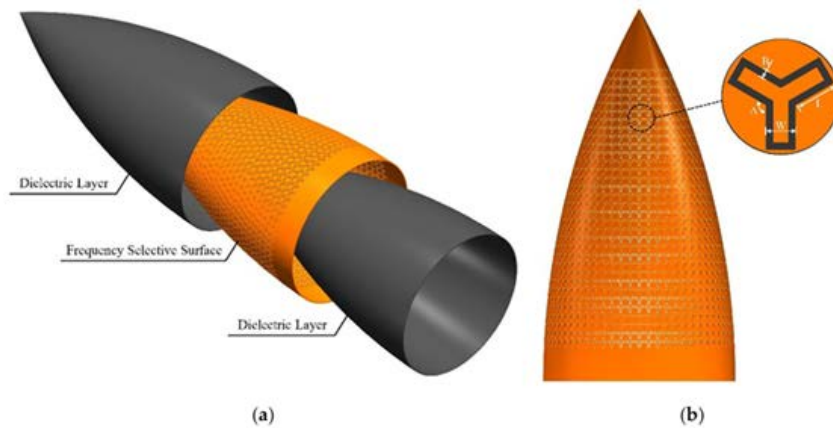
Frequency-selective radome design (a) exploded view; (b) FSS layer [62]
